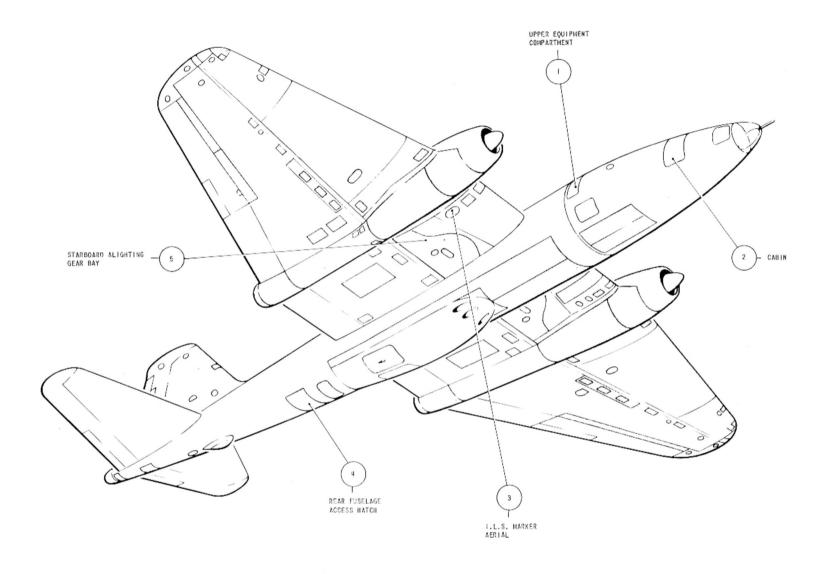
WIRELESS INSTALLATION-ACCESS PANELS, LOWER SURFACE AND STARBOARD SIDE
